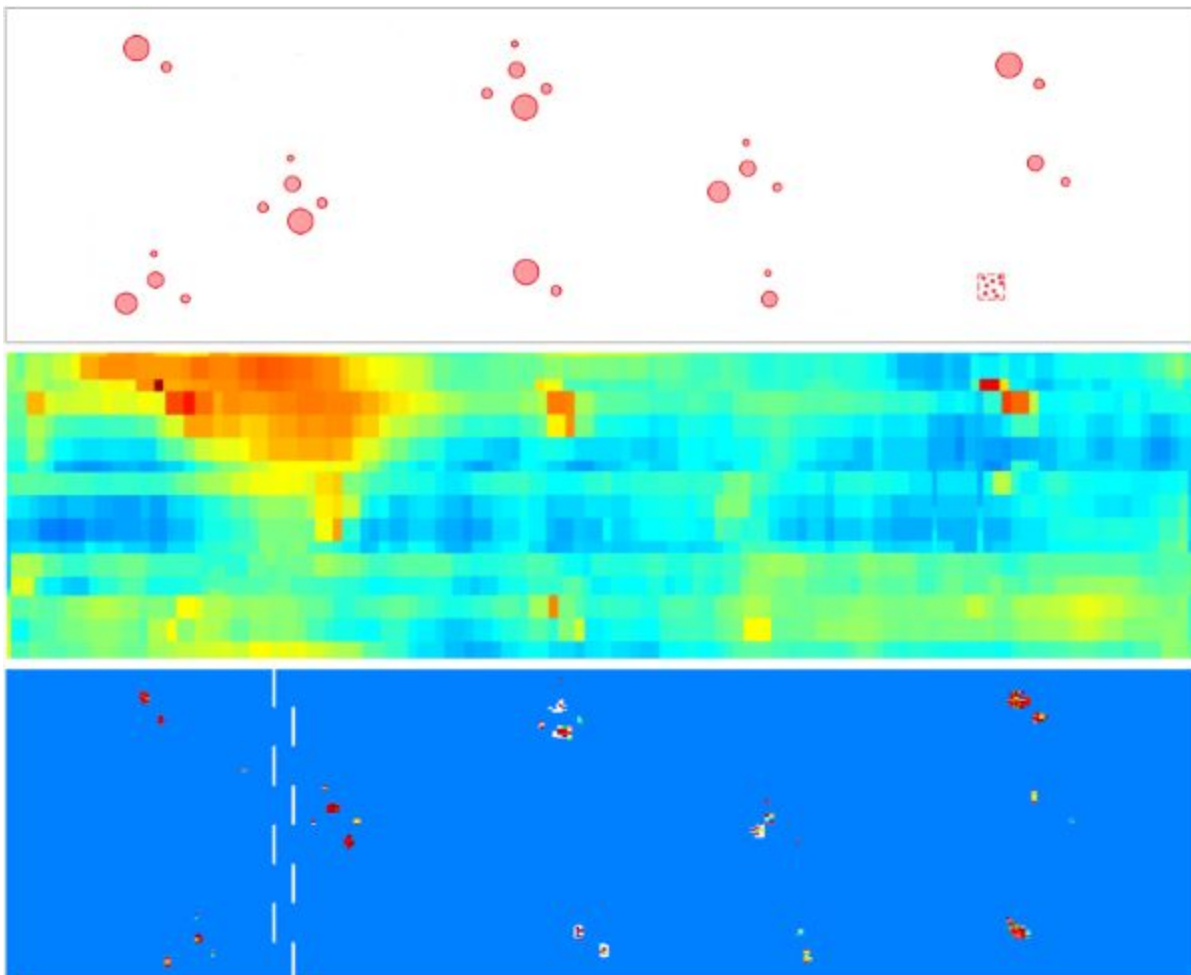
Thickness Results: Drawing of Details (top), PEC (mid), PAUT (bottom)
